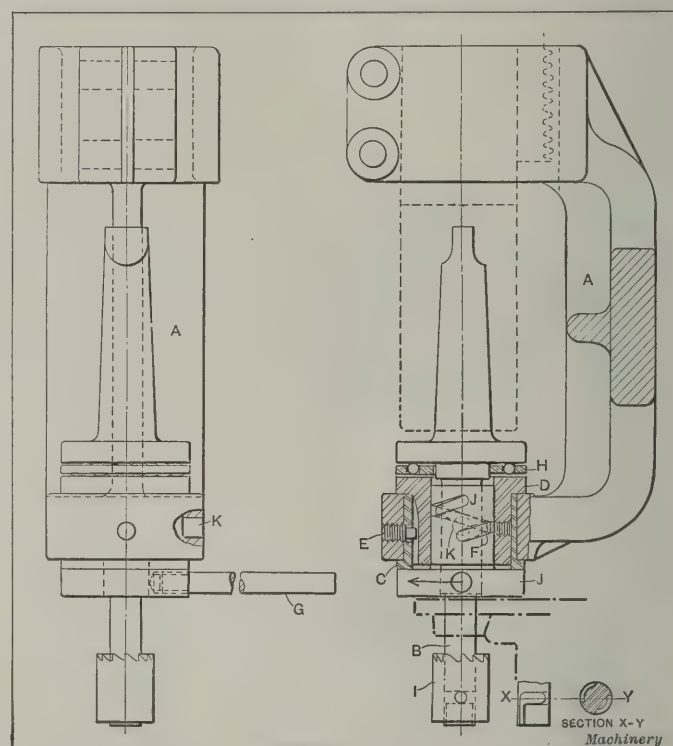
The Fixture used in Facing the Boss, showing the Manner in which it is applied to the Drill Press
